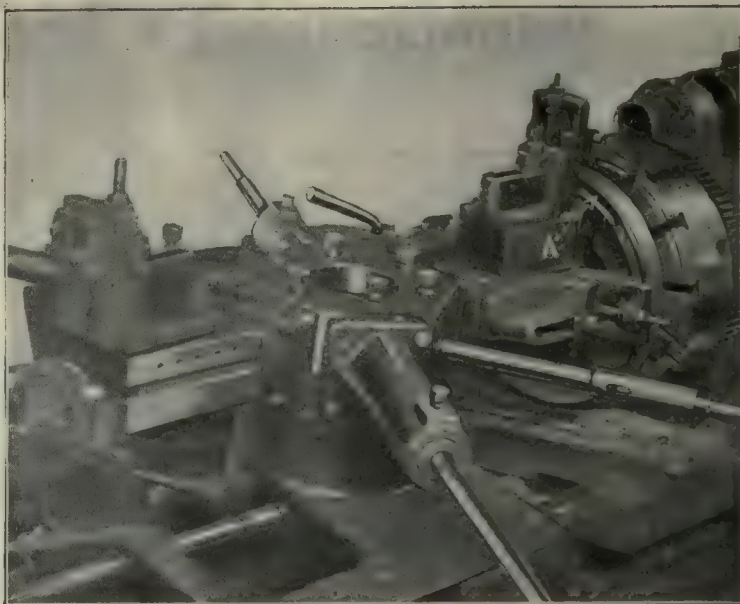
TURRET-LATHE OPERATIONS ON FLYWHEEL
